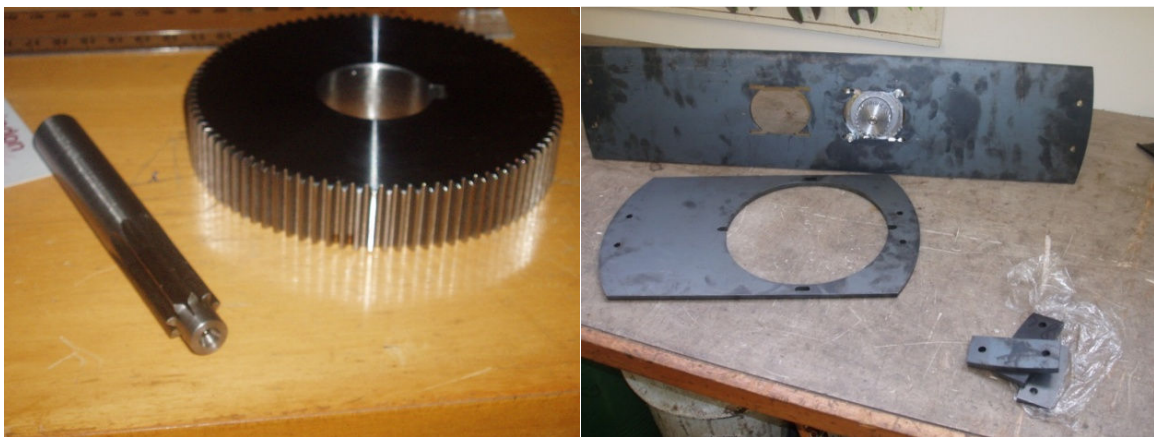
(Left) Gears used to increase speed to generator; (Right) mounting plates for generator and motors
